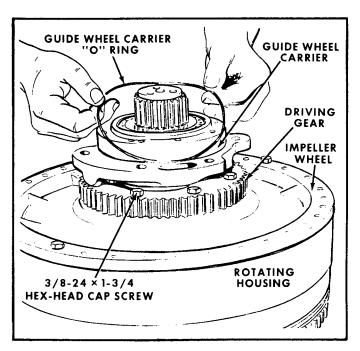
Removing the Guide Wheel Carrier "O" Ring from the Guide Wheel Carrier.
